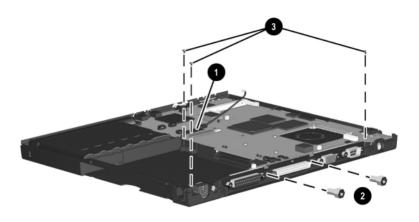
Removing the System Board Screws and Bushing Guides on an Evo Notebook N600c
